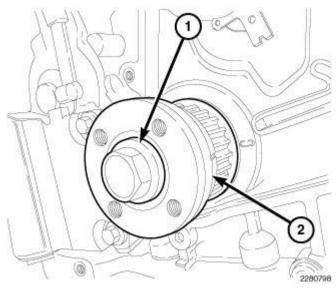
Crankshaft Timing Belt Sprocket & Bolt Courtesy of CHRYSLER LLC
